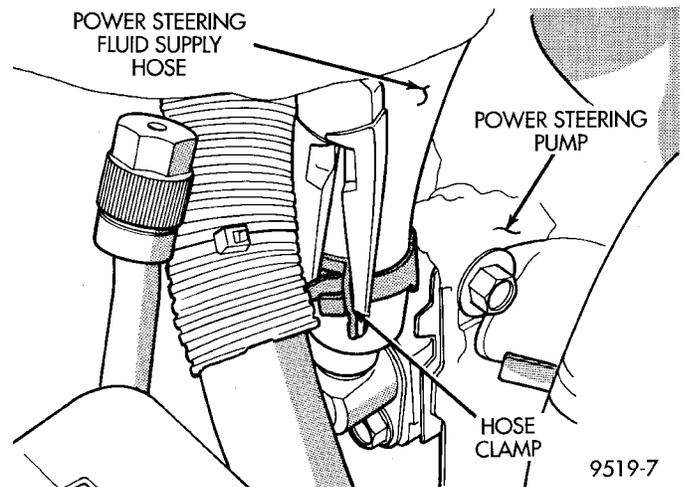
Power Steering Fluid Supply Hose At Power Steering Pump
